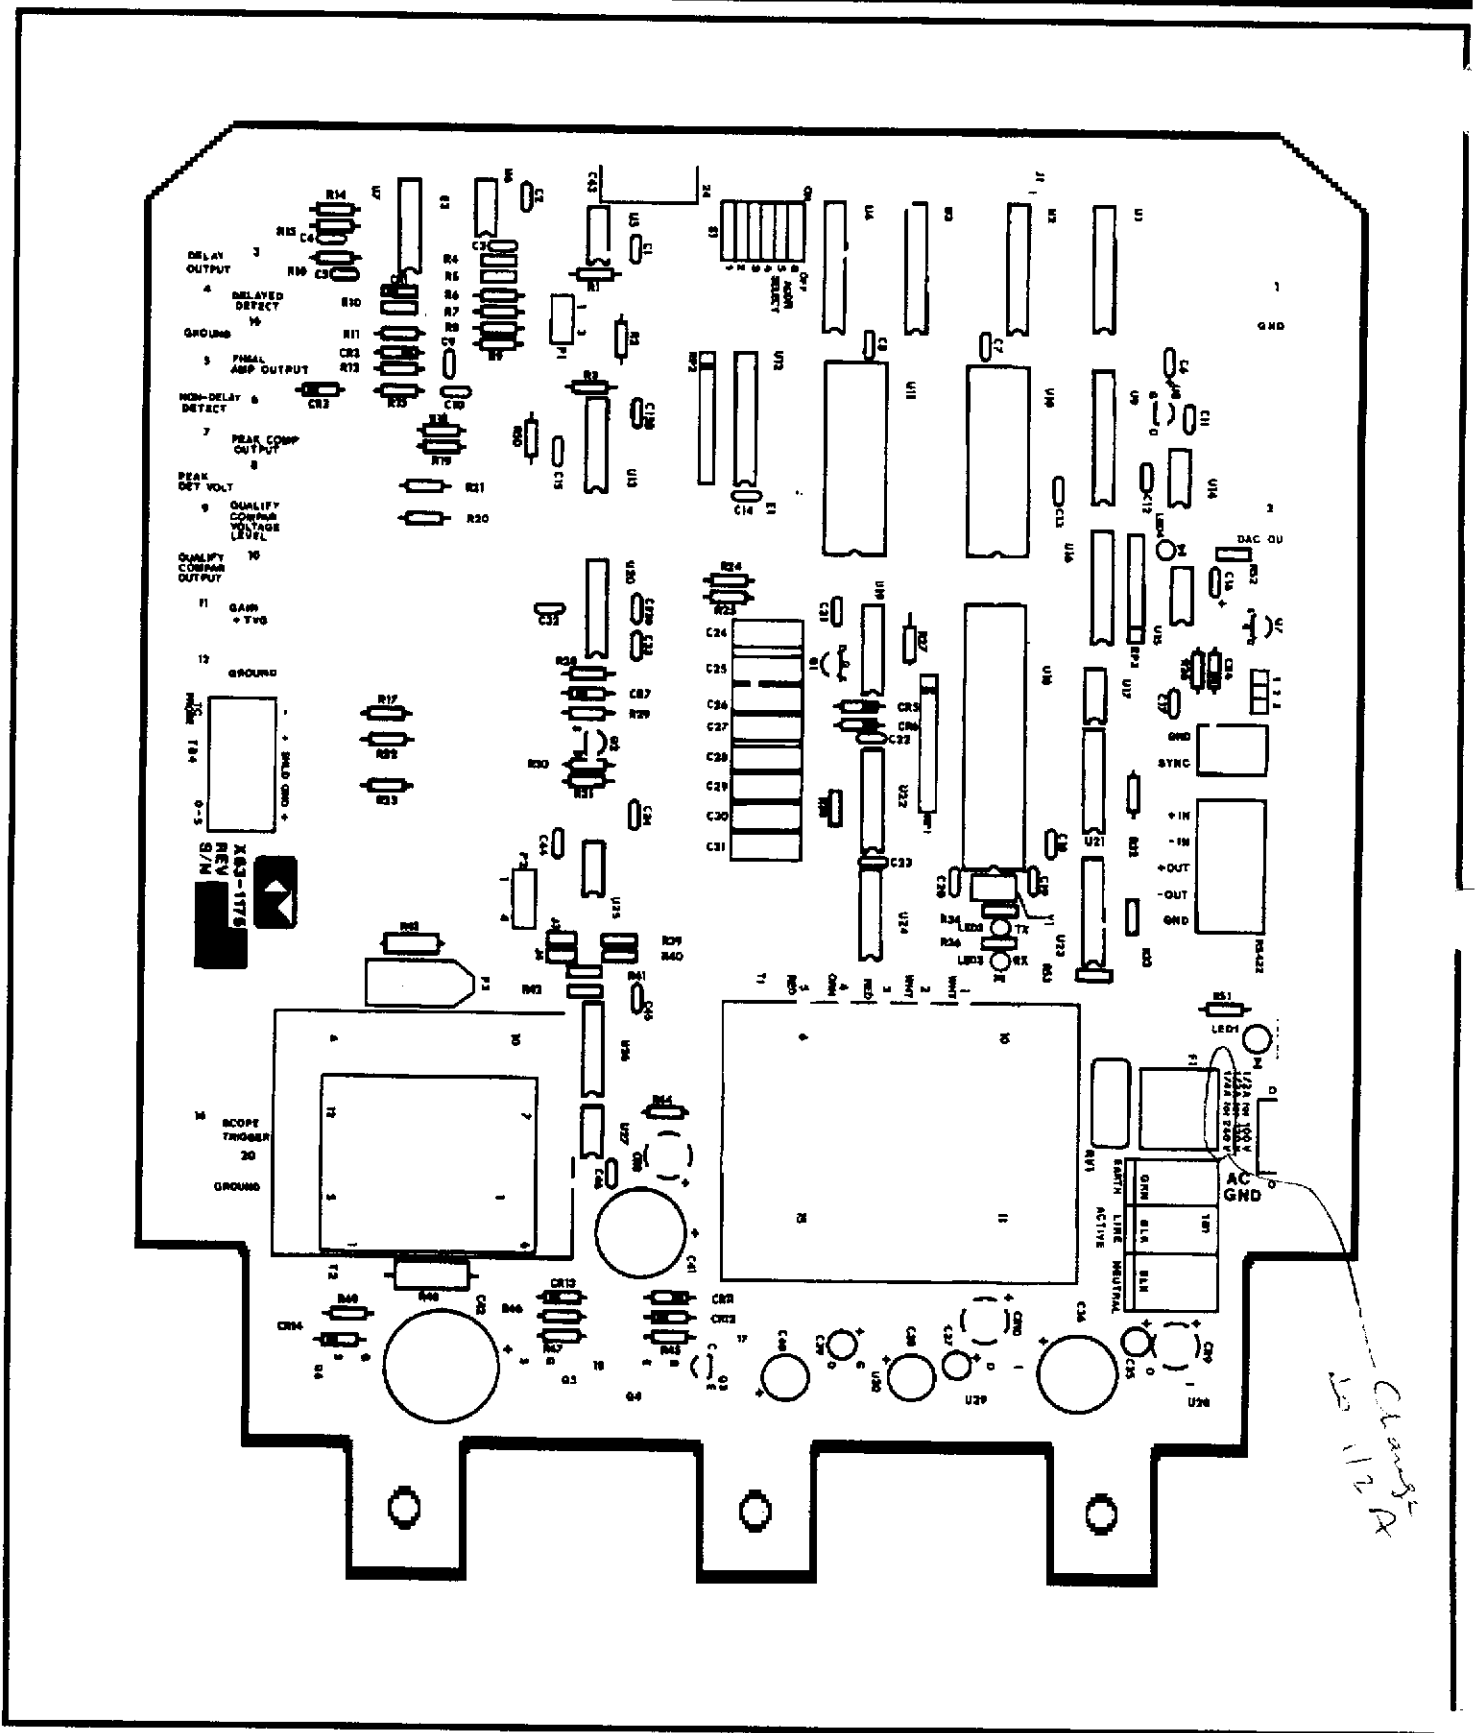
Assembly Drawing of the Intelligent Transceiver Unit (ITU) Board, P/N 63-1175.
